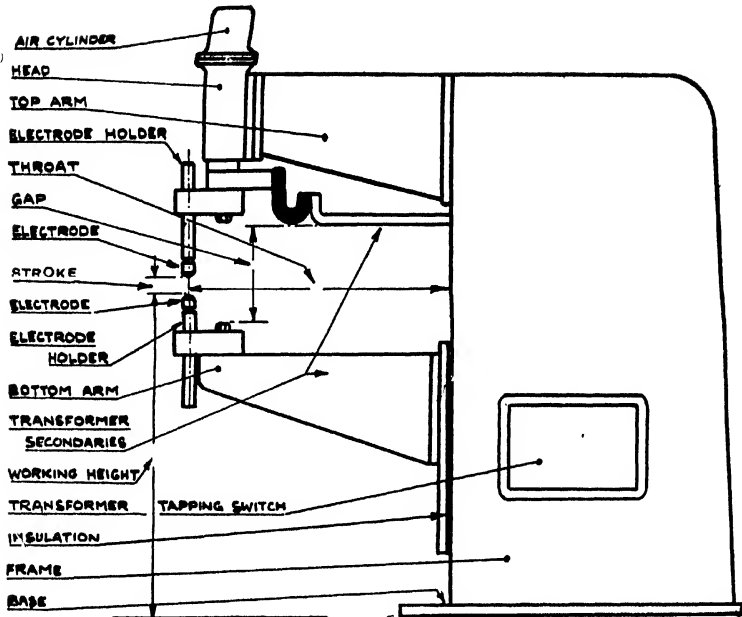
DIAGRAM SHOWING COMPONENT PARTS OF A MODERN SPOT WELDER
